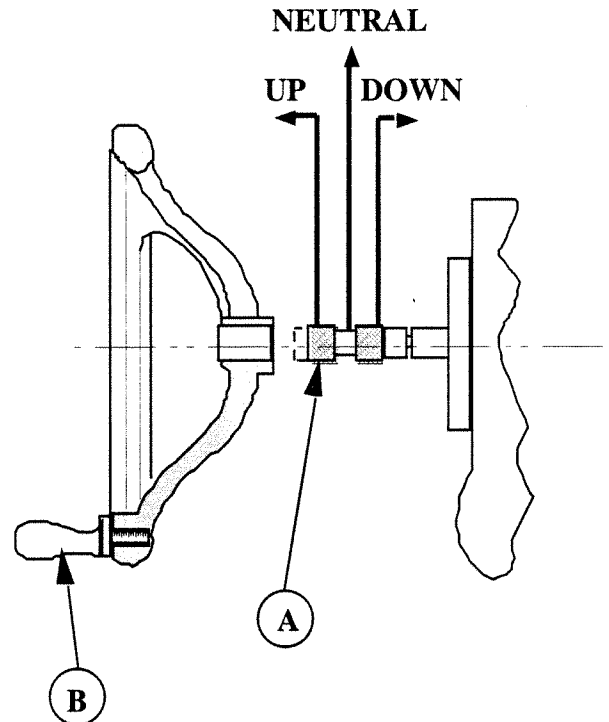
Feed Reverse Knob and Manual Feed Handwheel
